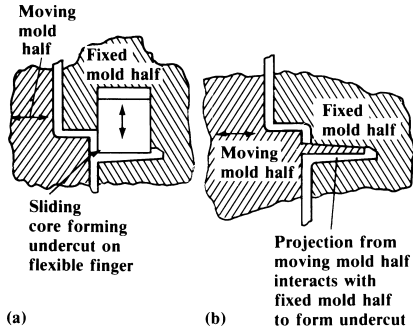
(left) (a) Arrangement for Molding an Undercut on the End of a Flexible Finger Using a Sliding Core; (b) With the Undercut Formed by a Mold Projection, the Sliding Core is Eliminated.
